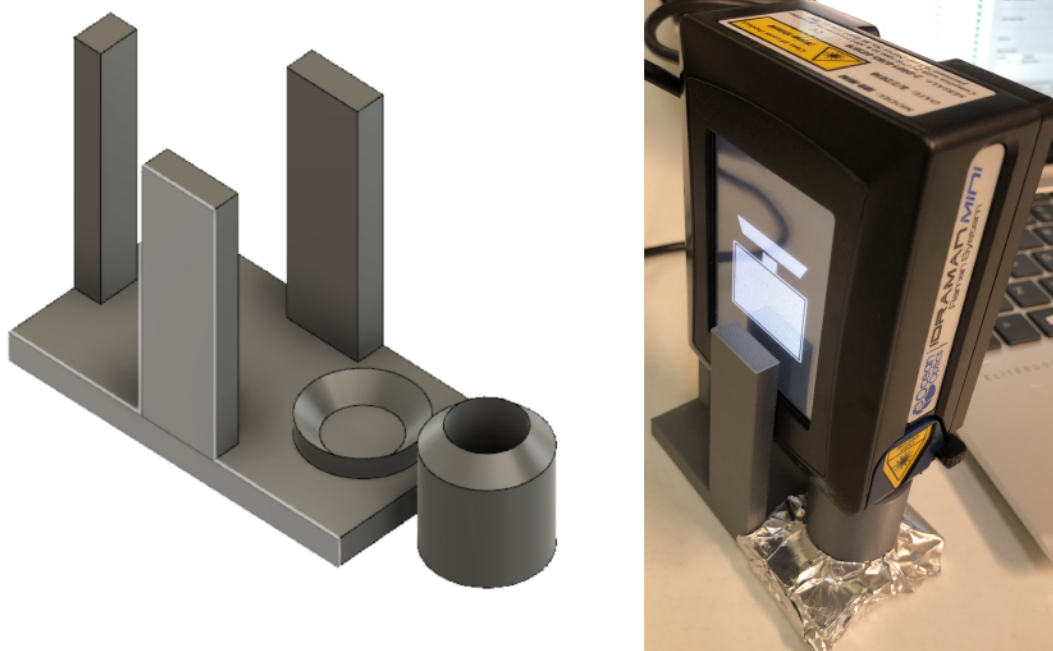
7 CAD DESIGN (LEFT) AND 3D-PRINTED HOLDER WITH IDRAMAN (RIGHT)
